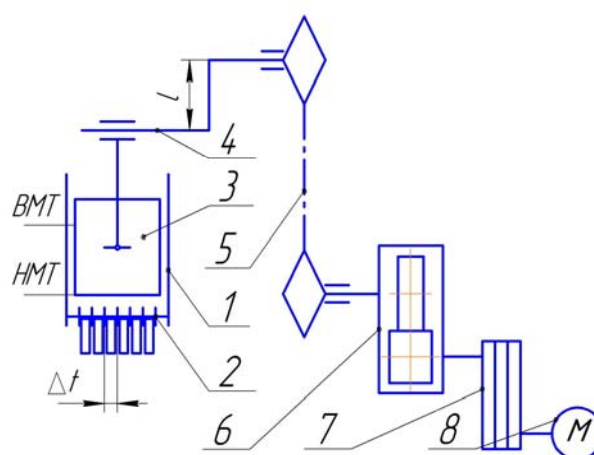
Constructional scheme of apple shredder into slices: 1 – working cylinder, 2 – plate-like stationary knives, 3 – piston, 4 – crank, 5 – chain gear, 6 – reducer, 7 – belt gear, 8 – electromotor, 9 – BMT – piston upper dead point, 10 – HMT – piston low dead point
